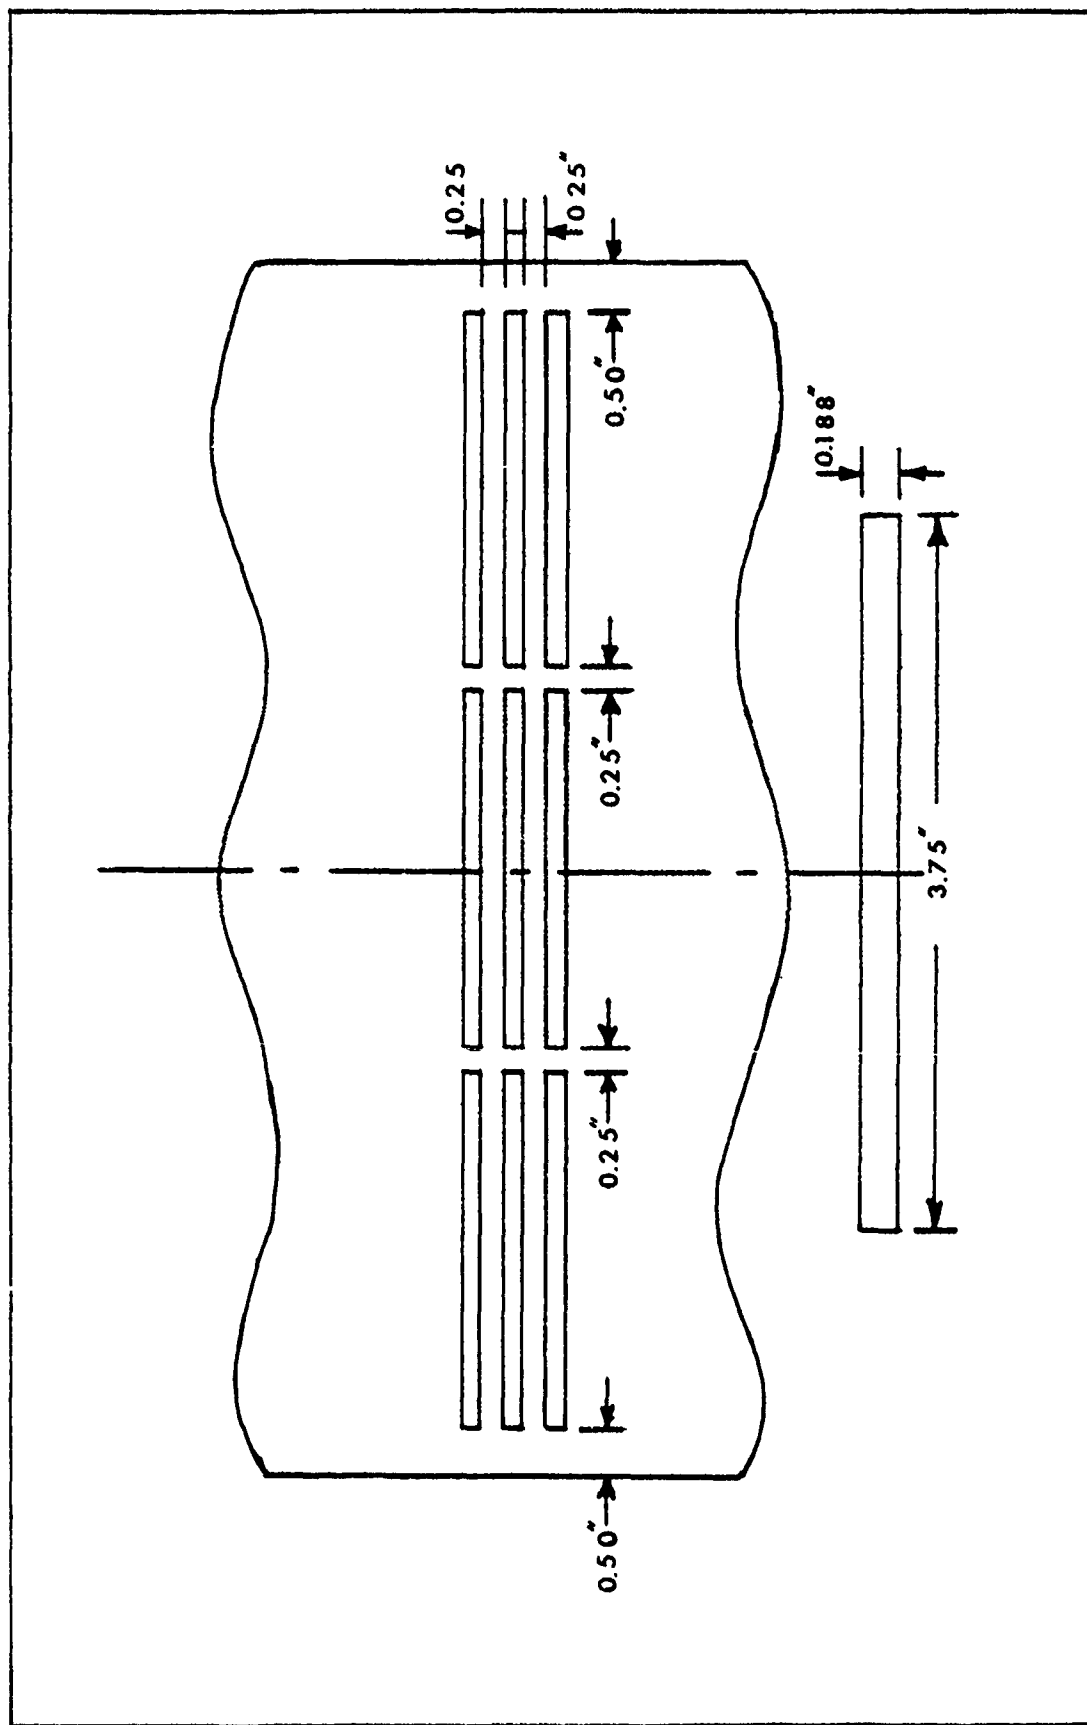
DIMENSIONAL ILLUSTRATION OF PLUG PORTING ARRANGEMENT
